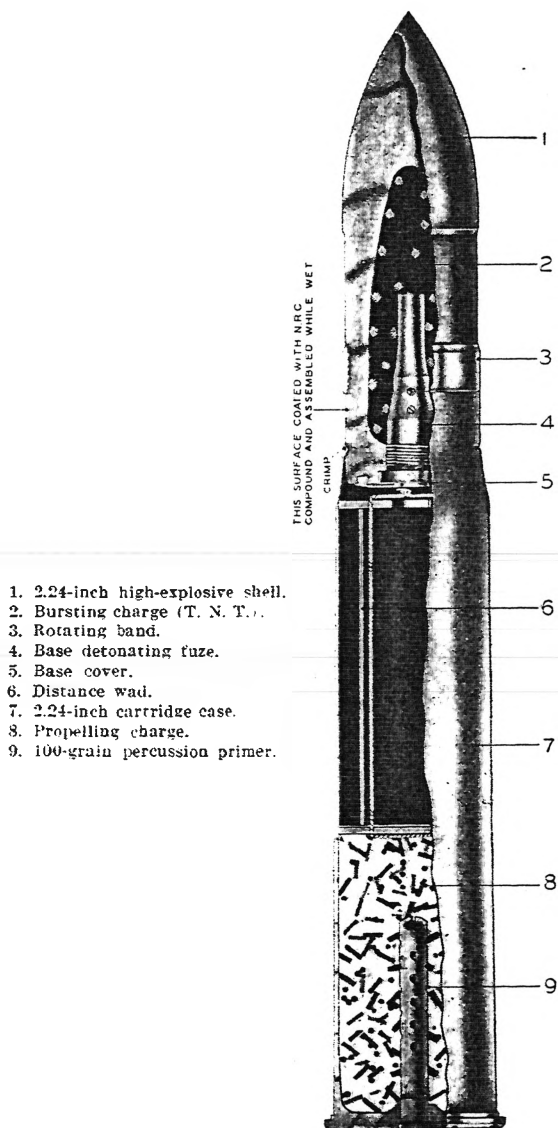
2.24-inch high-explosive shell ammunition—complete round
